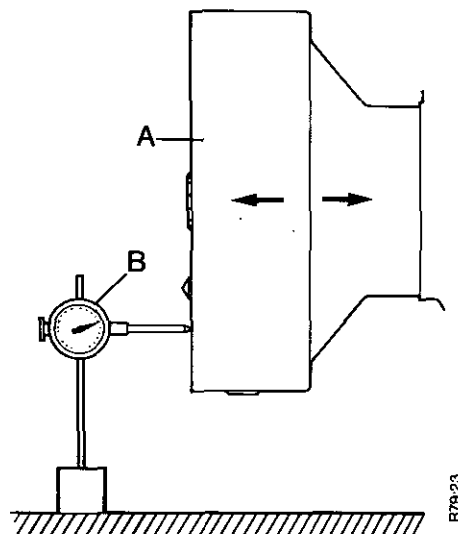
CHECKING END MOVEMENT OF HUB HOUSING
